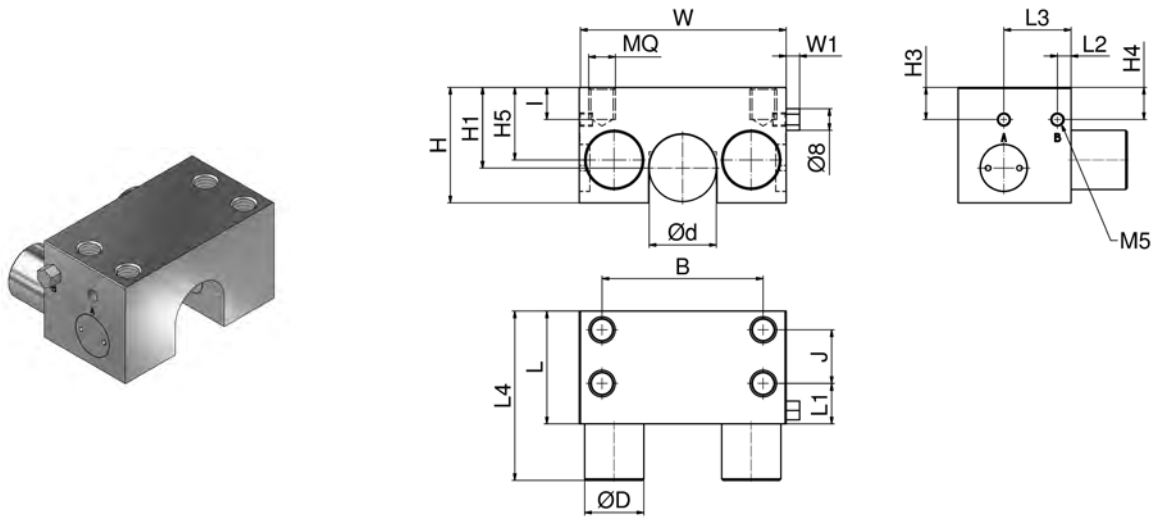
Passive pneumatic clamping elements for ball bushings
